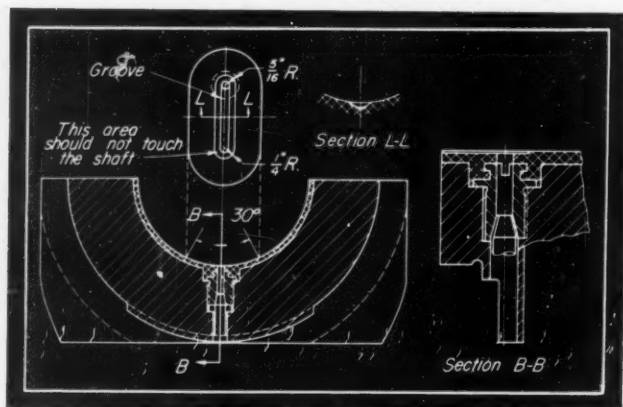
Detail of a 5-in. by 10-in. bearing with oil lift, showing the proportions of the groove. Drawing, courtesy Westinghouse Electric Corp.
